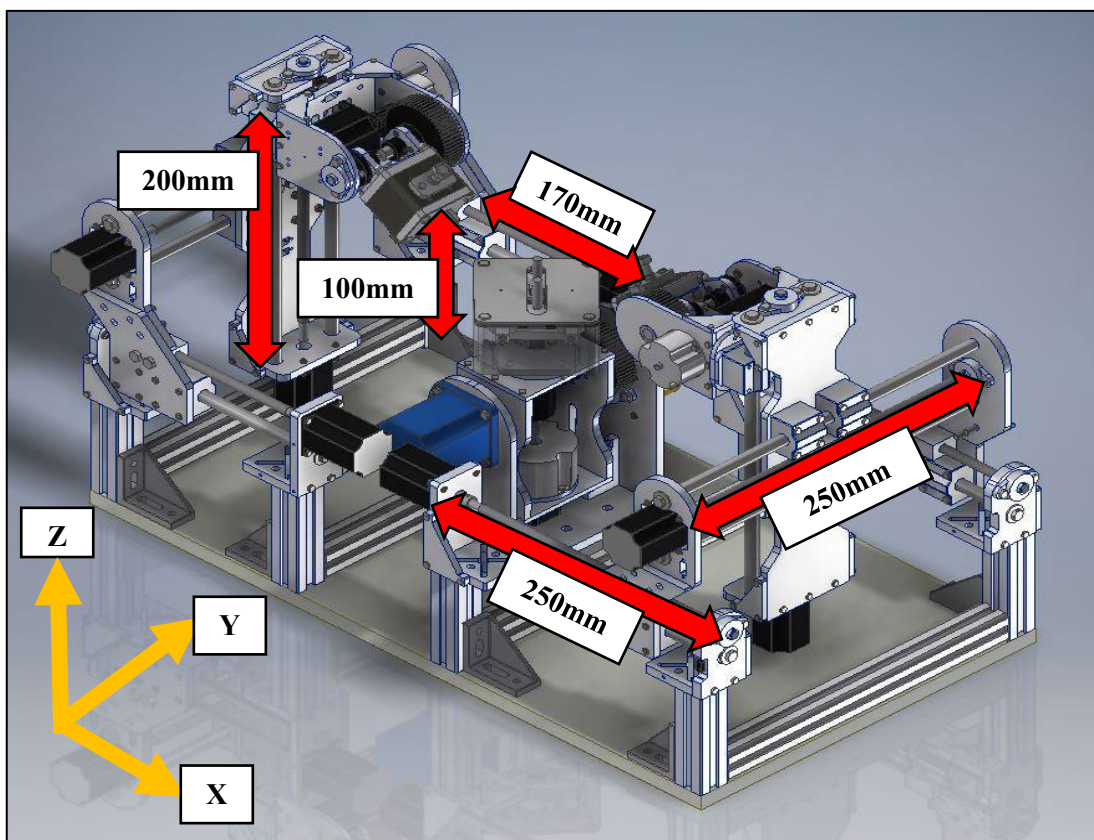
CAD model of the Flexible Fixturing System with co-ordinate system and dimensions
